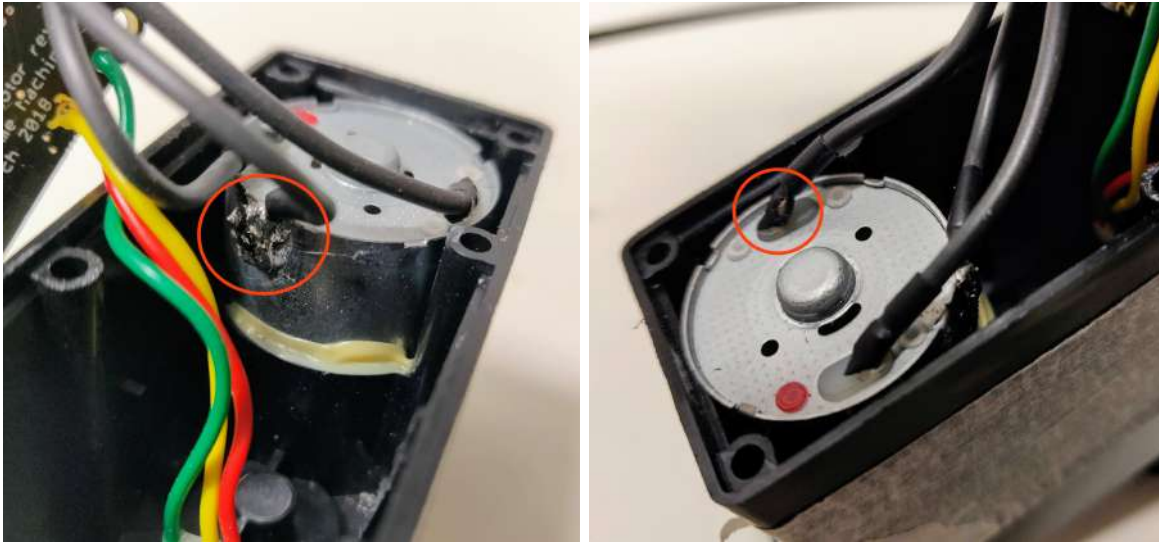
On the left side: Soldering the motor wire to the motor with the missing ground pin. On the right side: Damaged motor wire after closing the servo cover.
